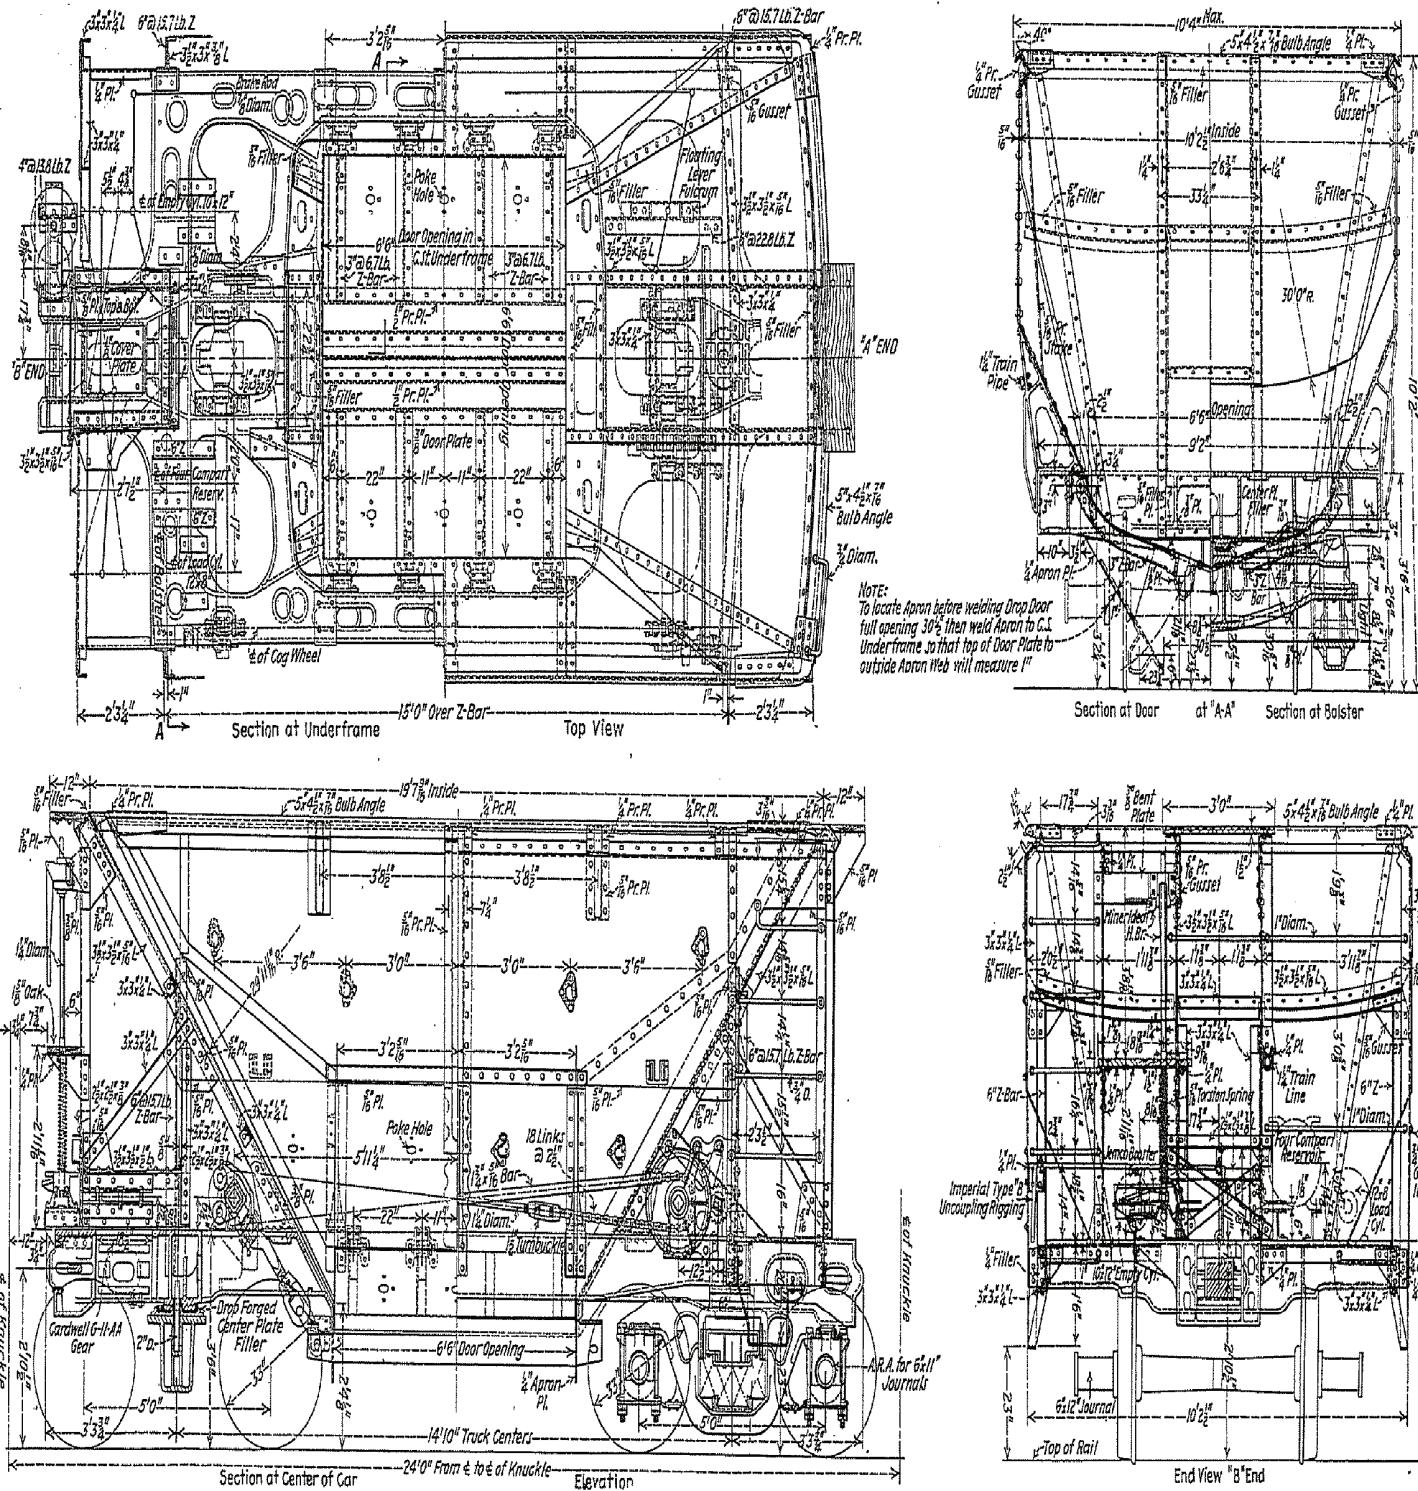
,666—Plan, elevation and sections of Duluth, Missabe & Iron Range 80-ton capacity hopper ore car with Commonwealth cast steel underframe. Road Class U-14.
